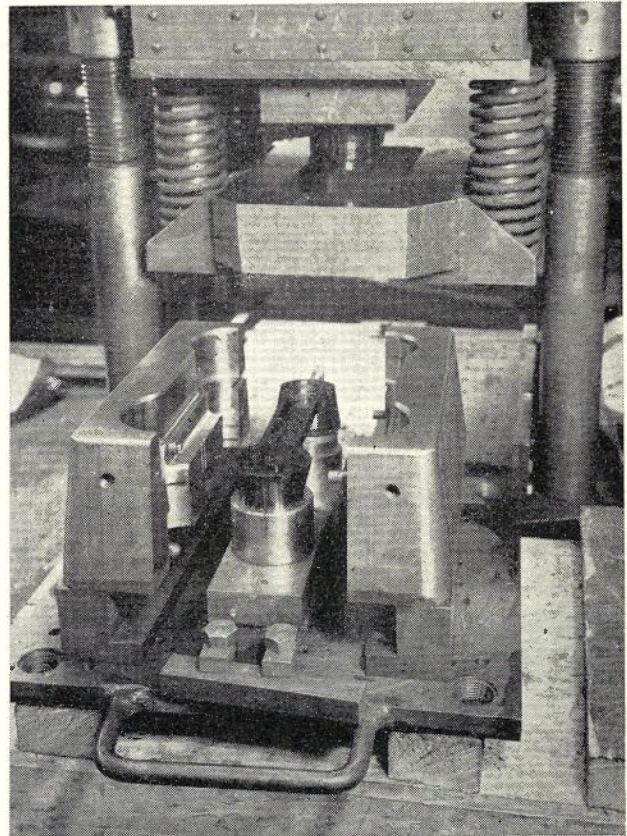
Transmitter and receiver housing component. Press "set up" —extracting position.
